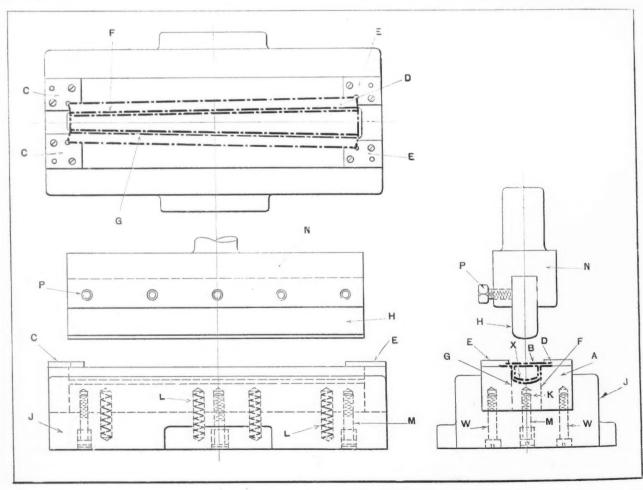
Die for Forming Tapered Part Illustrated in Fig. 11
